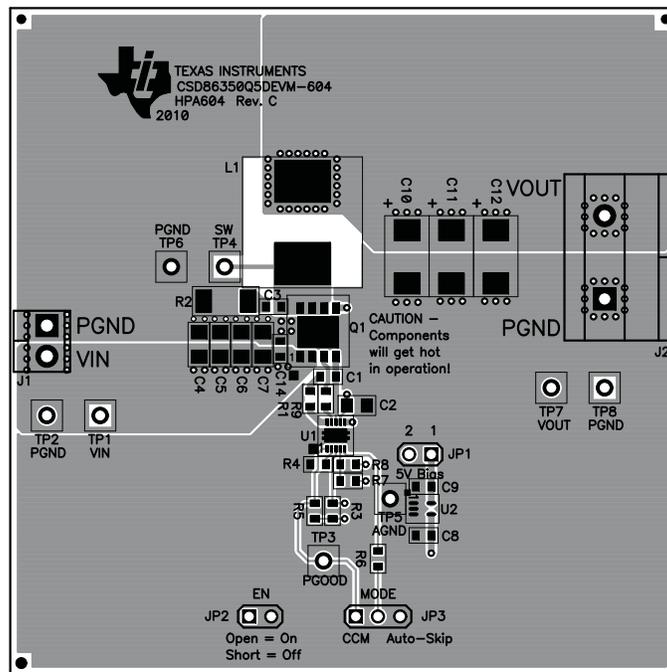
CSD86350Q5DEVM-604 Top Component Placement (Top View)
